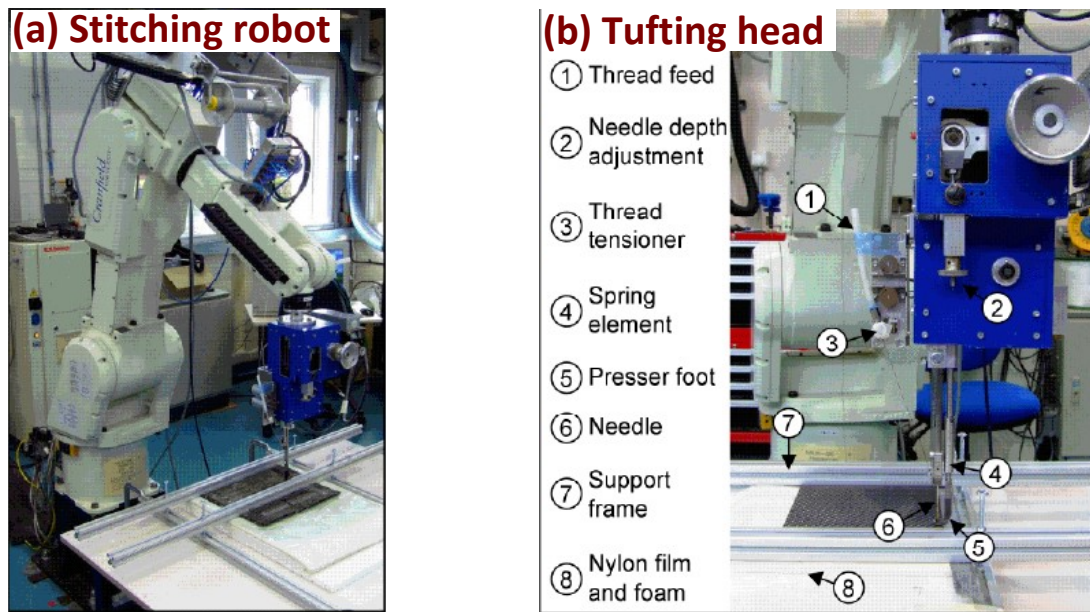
(a) Kawasaki FN20 stitching robot and (b) KSL KL150 tufting head [64].
